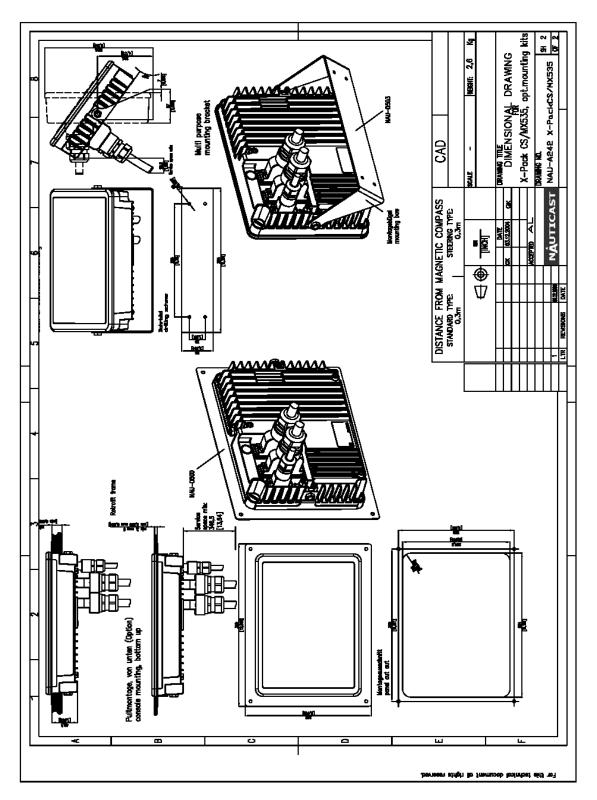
Dimensional Drawing for MX535, opt. Mounting Kits
